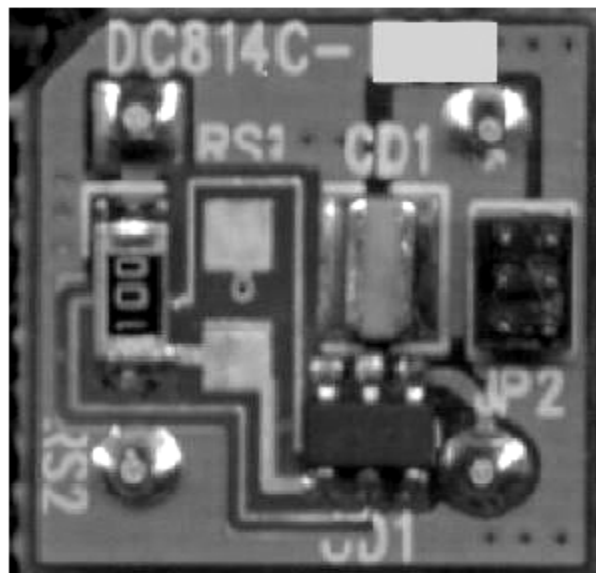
DC814C-X DIP-8 Clock Board (Top side view)
